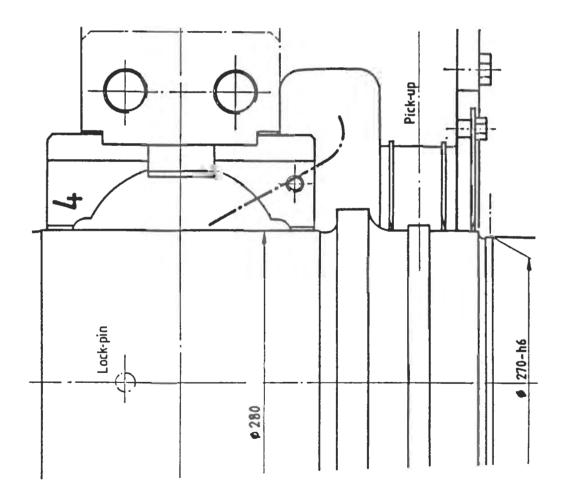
Technical details of instruments for axial bearings mounted from outside of the casing
